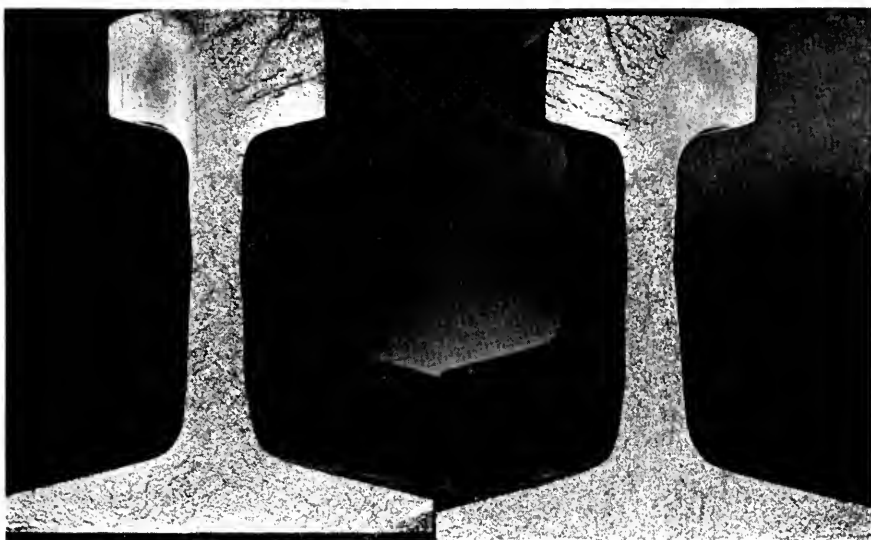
Fractured faces of an oxyacetylene pressure butt welded rail joint, specimen 230A, that failed after being subjected to 33,500 cycles of repeated loading in the 12-inch rolling-load machine under a 47,500-lb wheel load. This failure can be attributed to a lack of fusion at the weld interface (unfused area noted in head) thereby resulting in a weakened structure.
